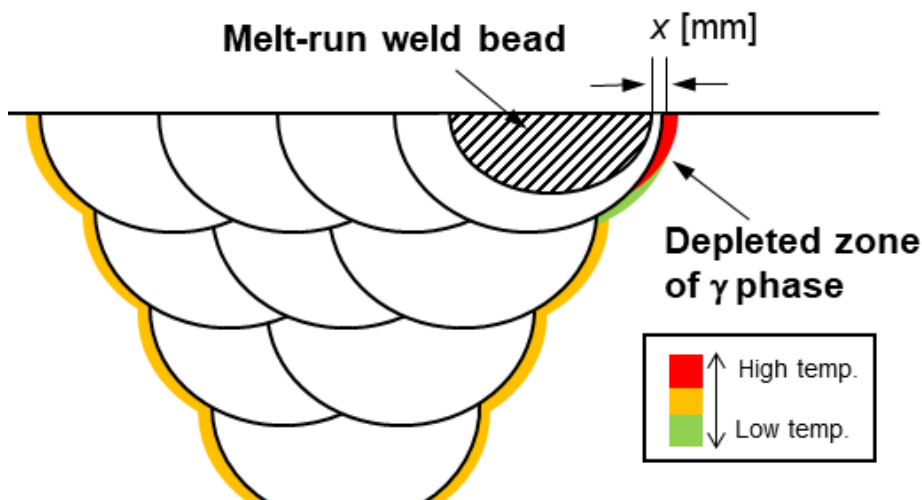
Schematic of reheat–bead welding.
